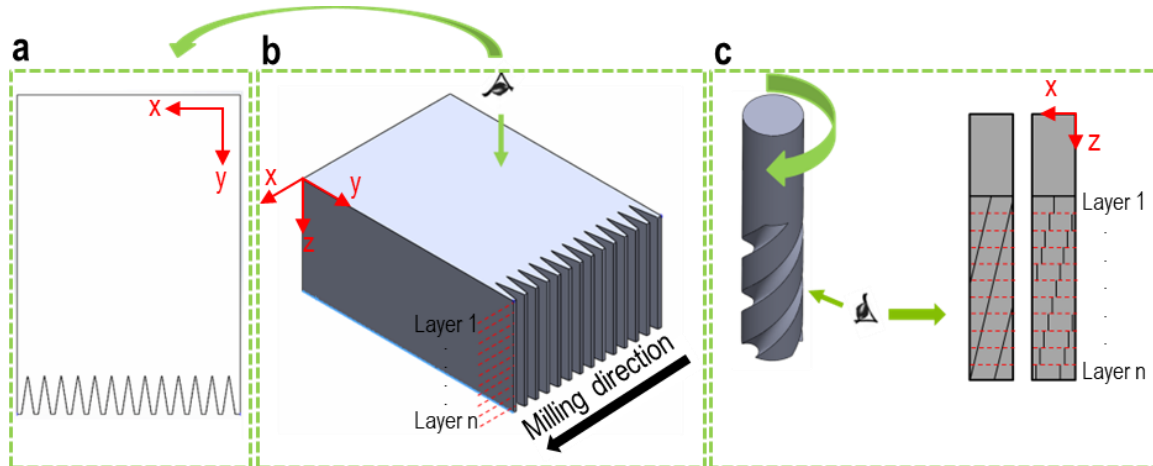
The process of converting a 3D model to a 2D model. a) 2D geometry of the workpiece from a top view, b) workpiece discretization, c) cutting tool discretization.
